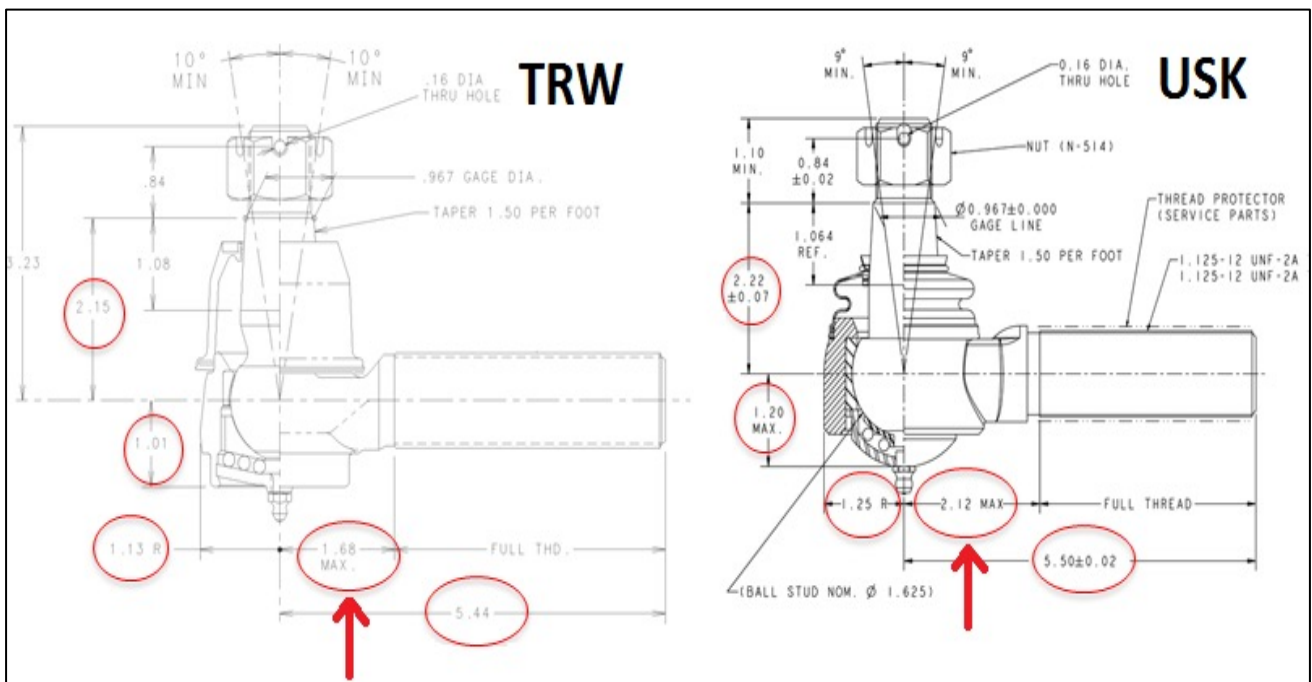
TRW and USK Tie Rod End Engineering Drawings
